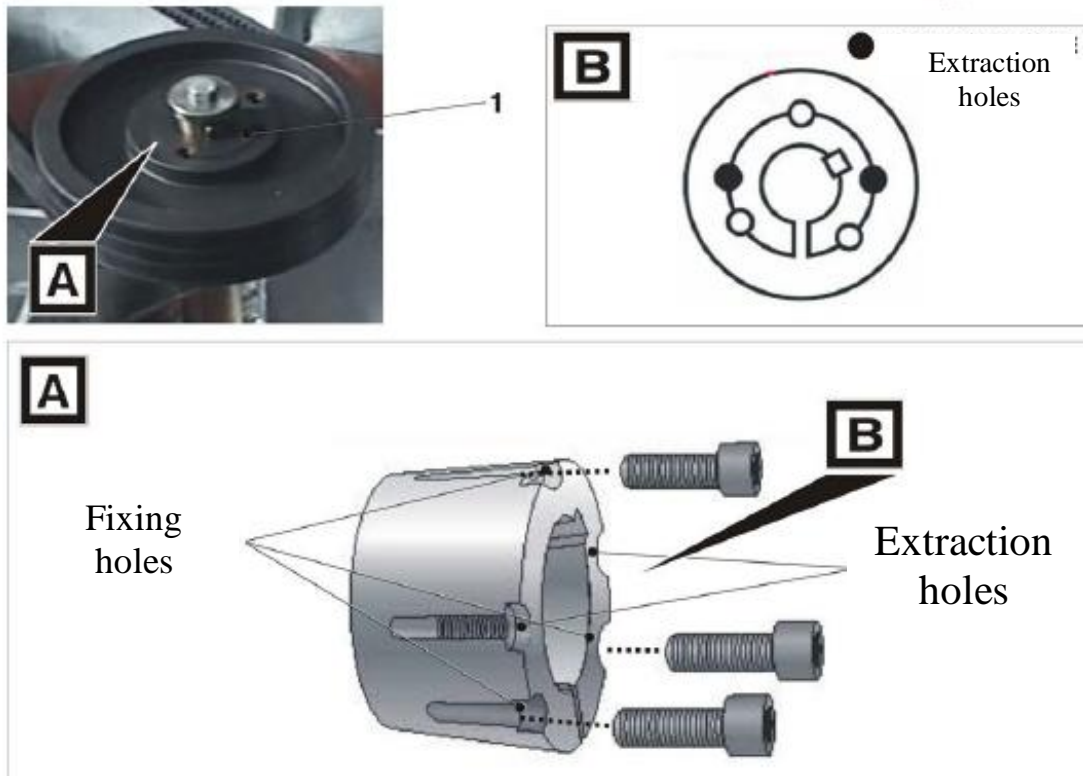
Detail of the conical bushing with indication of the bolt seats.
